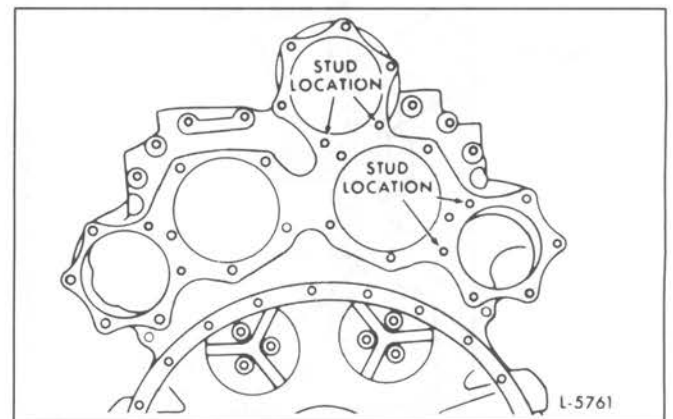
Flywheel Housing Cover Attaching Studs (Naturally Aspirated Engines)
